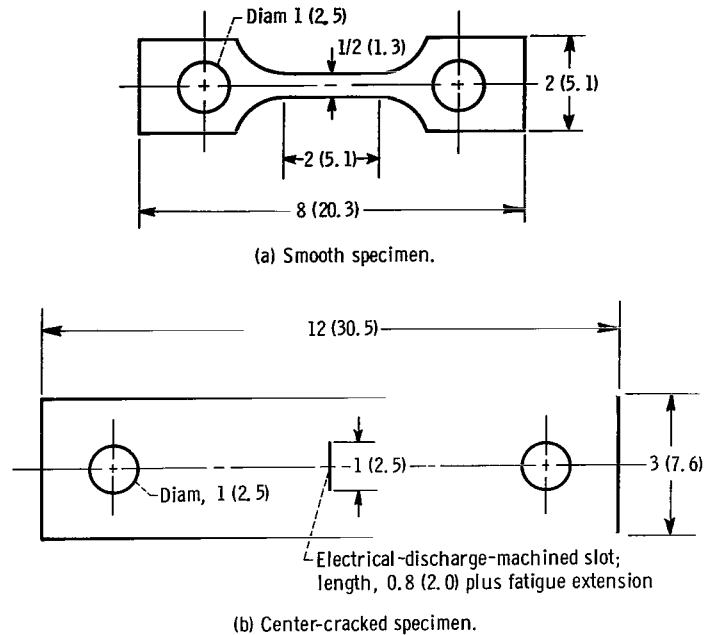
Directional specimens. (All dimensions are in inches (cm).)
